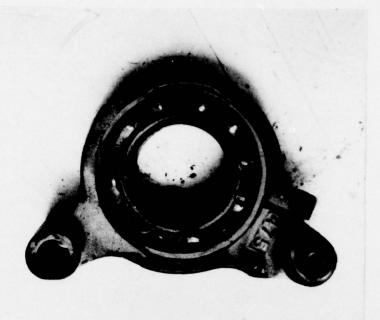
Bearing S/N TRL-4. Removed Position 7 With 11.6 Hours Time. Shown With Seal Removed.
